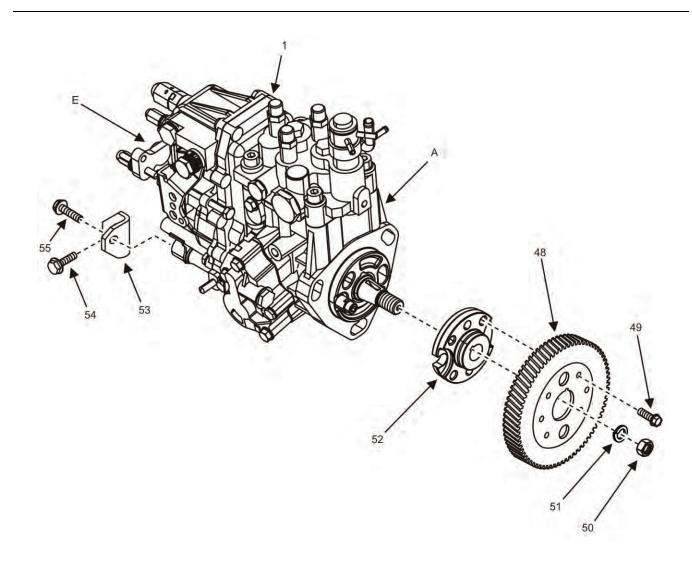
Fuel Injection Pump (Sheet 1 of 4).
